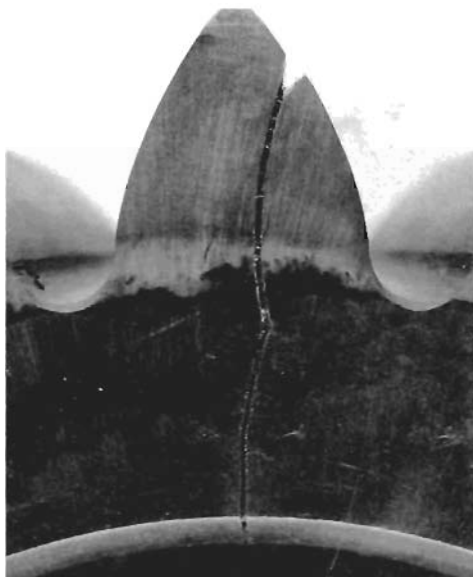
Spur gear. External rupture (assembled, but not in service) with origin at the end face. (See Fig. 3-5 and 4-51.)
